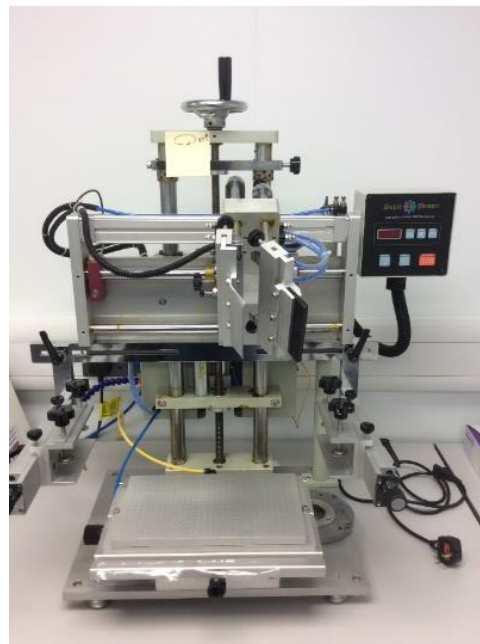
Bench-top Mascoprint S200HFC semi-automatic solder screen printing machine with stencil holder.
